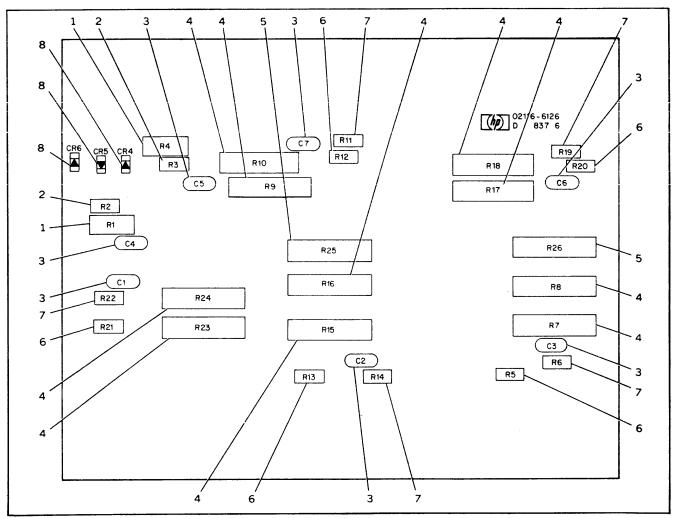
A121A1 Overvoltage Component Board Assembly (02116-6126),
